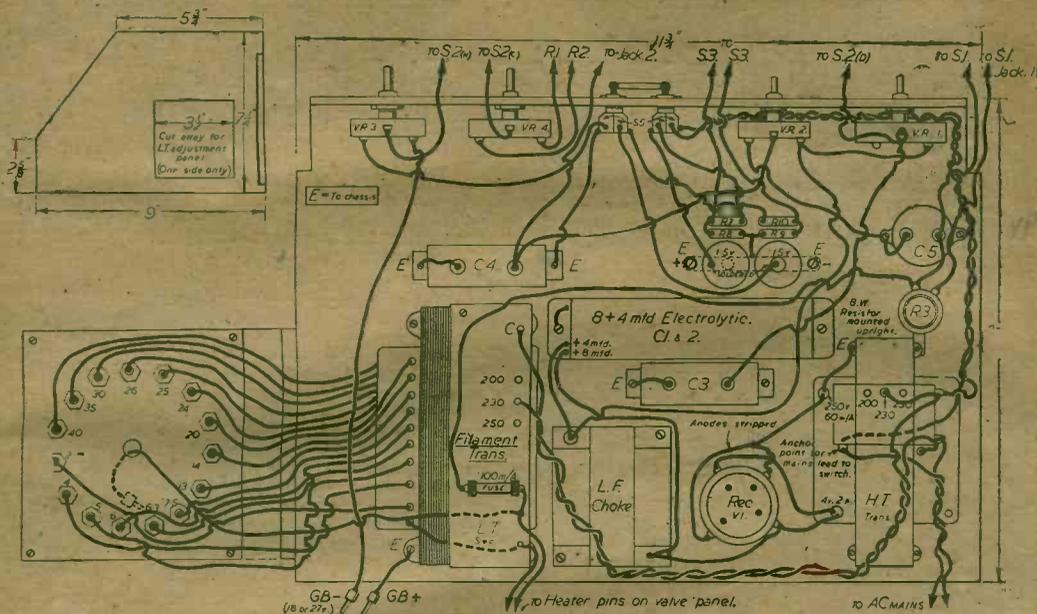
Layout and wiring of power unit. The L.T. voltage adjustment panel is accessible from side of panel as shown by the inset.
